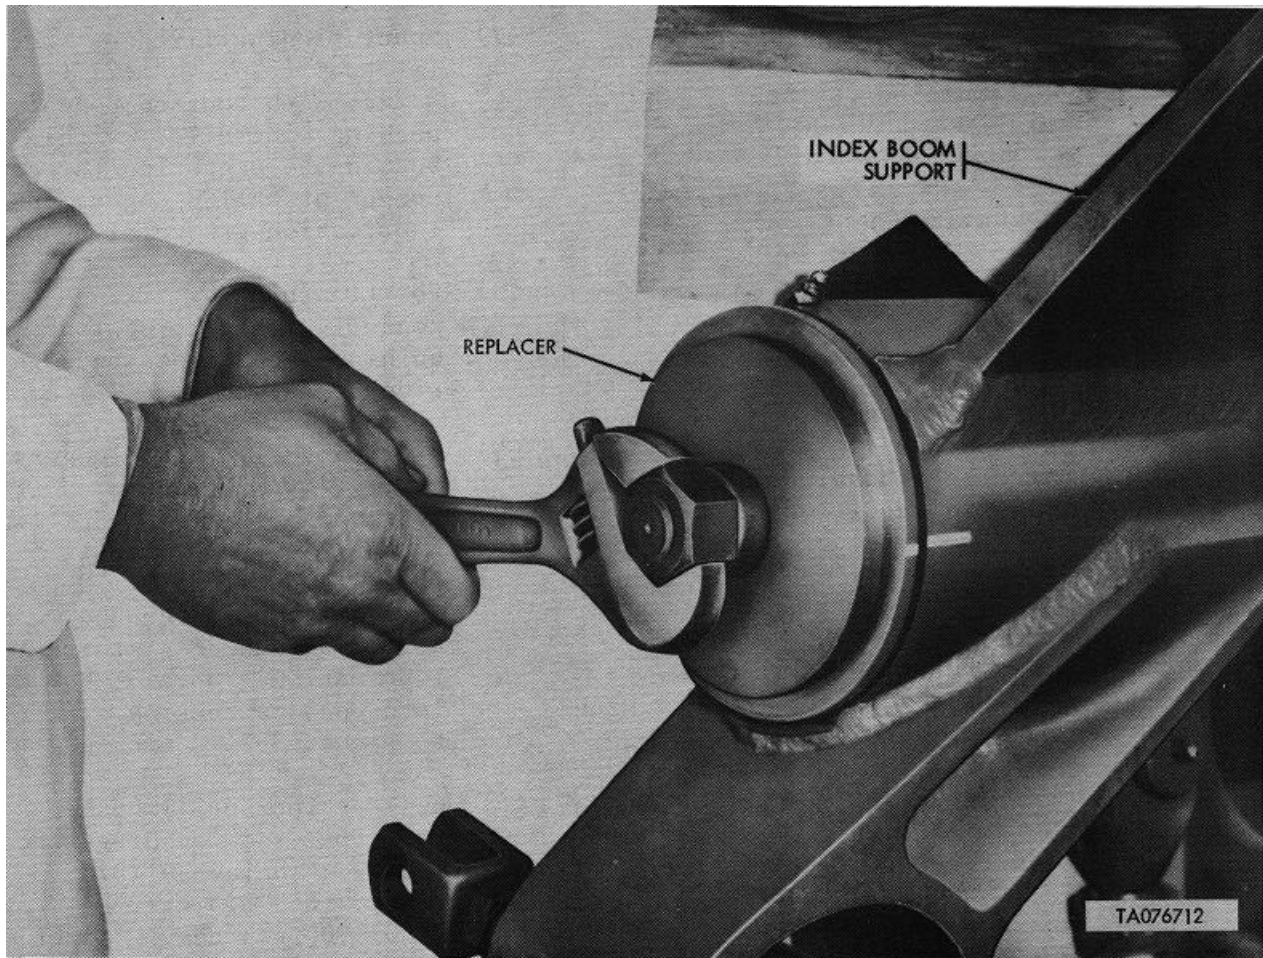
Index Boom Support - Bearing Installation Using Replacer
